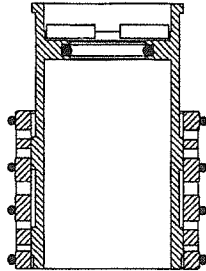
LUBRICATED APA VALVE ASSEMBLY
